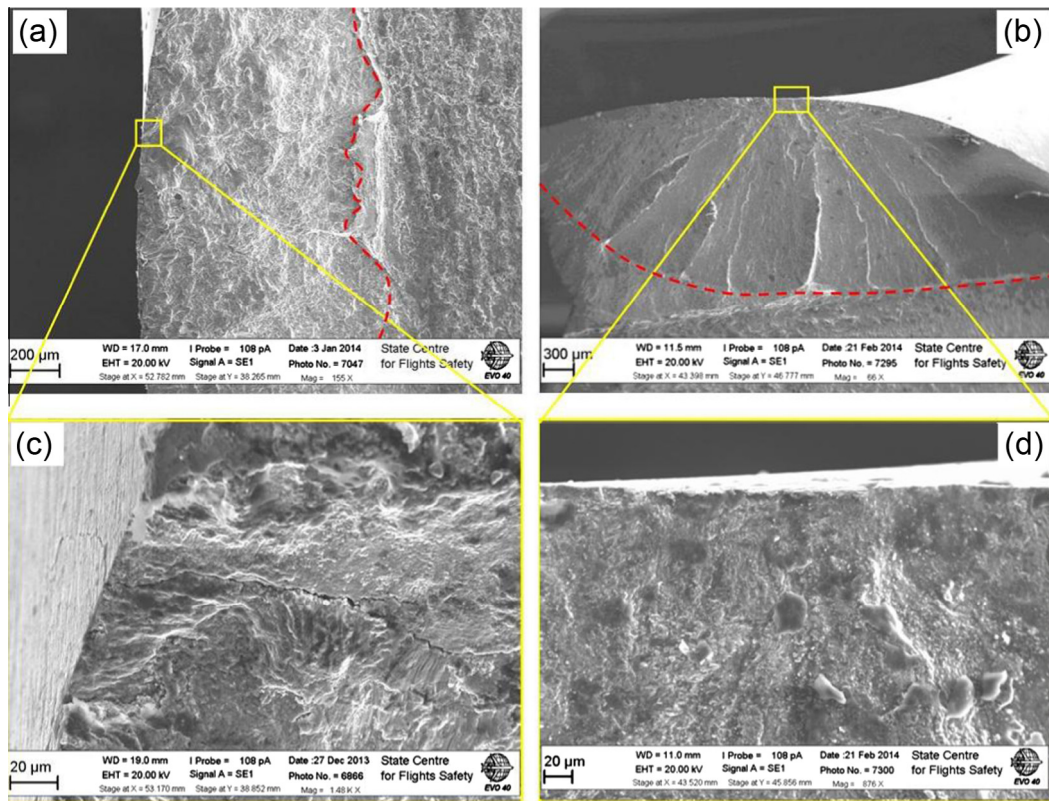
Surface crack initiation (a and b) macroscopic views of the forged and extruded alloys respectively (c and d) zoomed views of the initiation sites for the forged and extruded alloys respectively.
